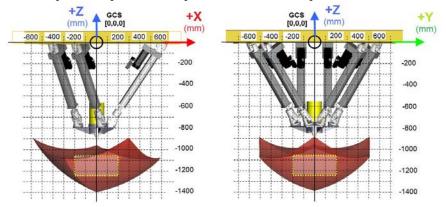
Workspace (by 0° tilt angle of moving platform) and dimensions of a workpiece
